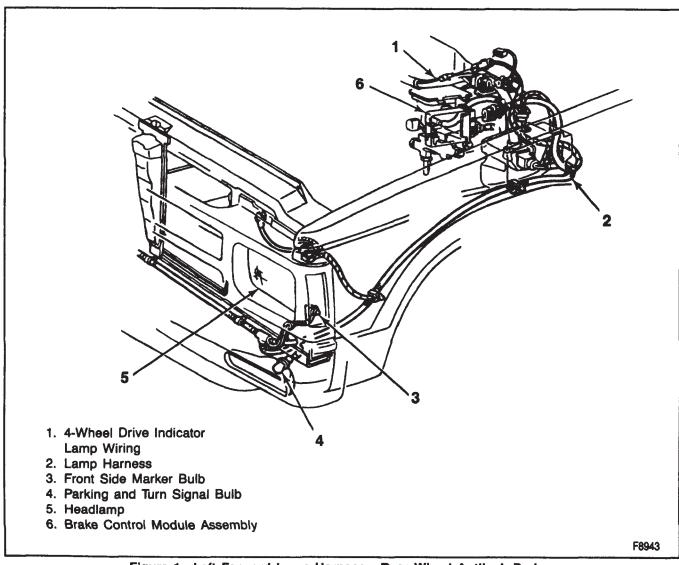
Left Forward Lamp Harness - Rear Wheel Antilock Brakes
